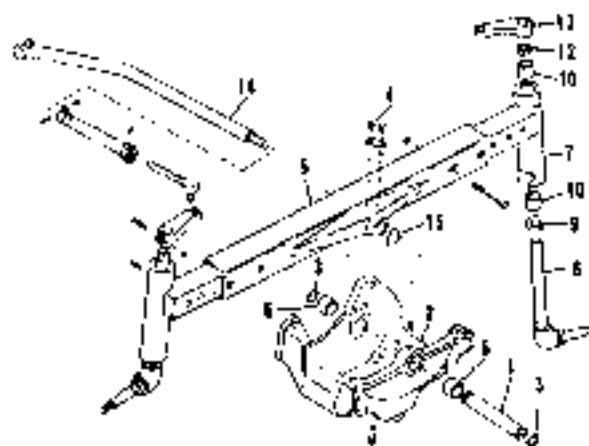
Exploded view of typical straight axle standard on MF235 models and all Vineyard models.
